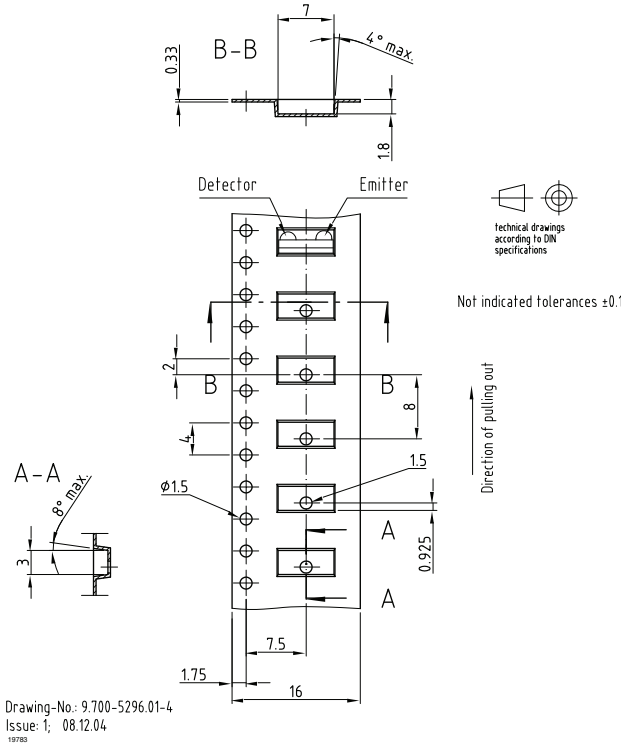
Tape for 1.6 mm Package Side View Oriented (TFBxx6xxTRx)
